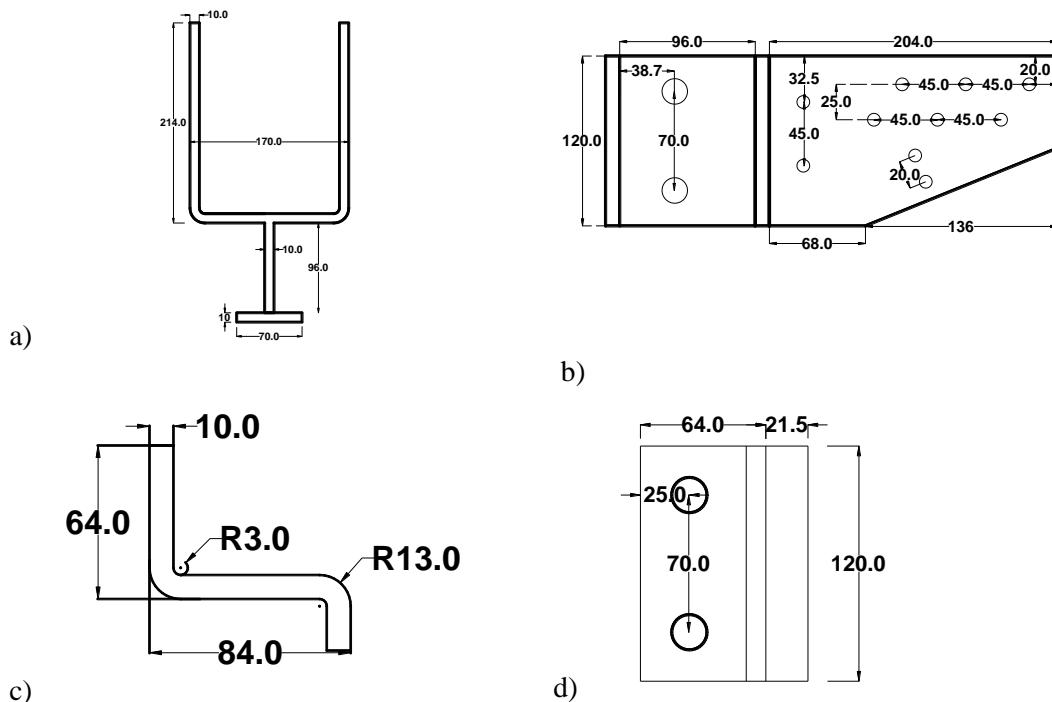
Geometry of the component of the joint: T-plug Top view (a); T-plug side view (b); single socket top view (c) single socket side view (d)
